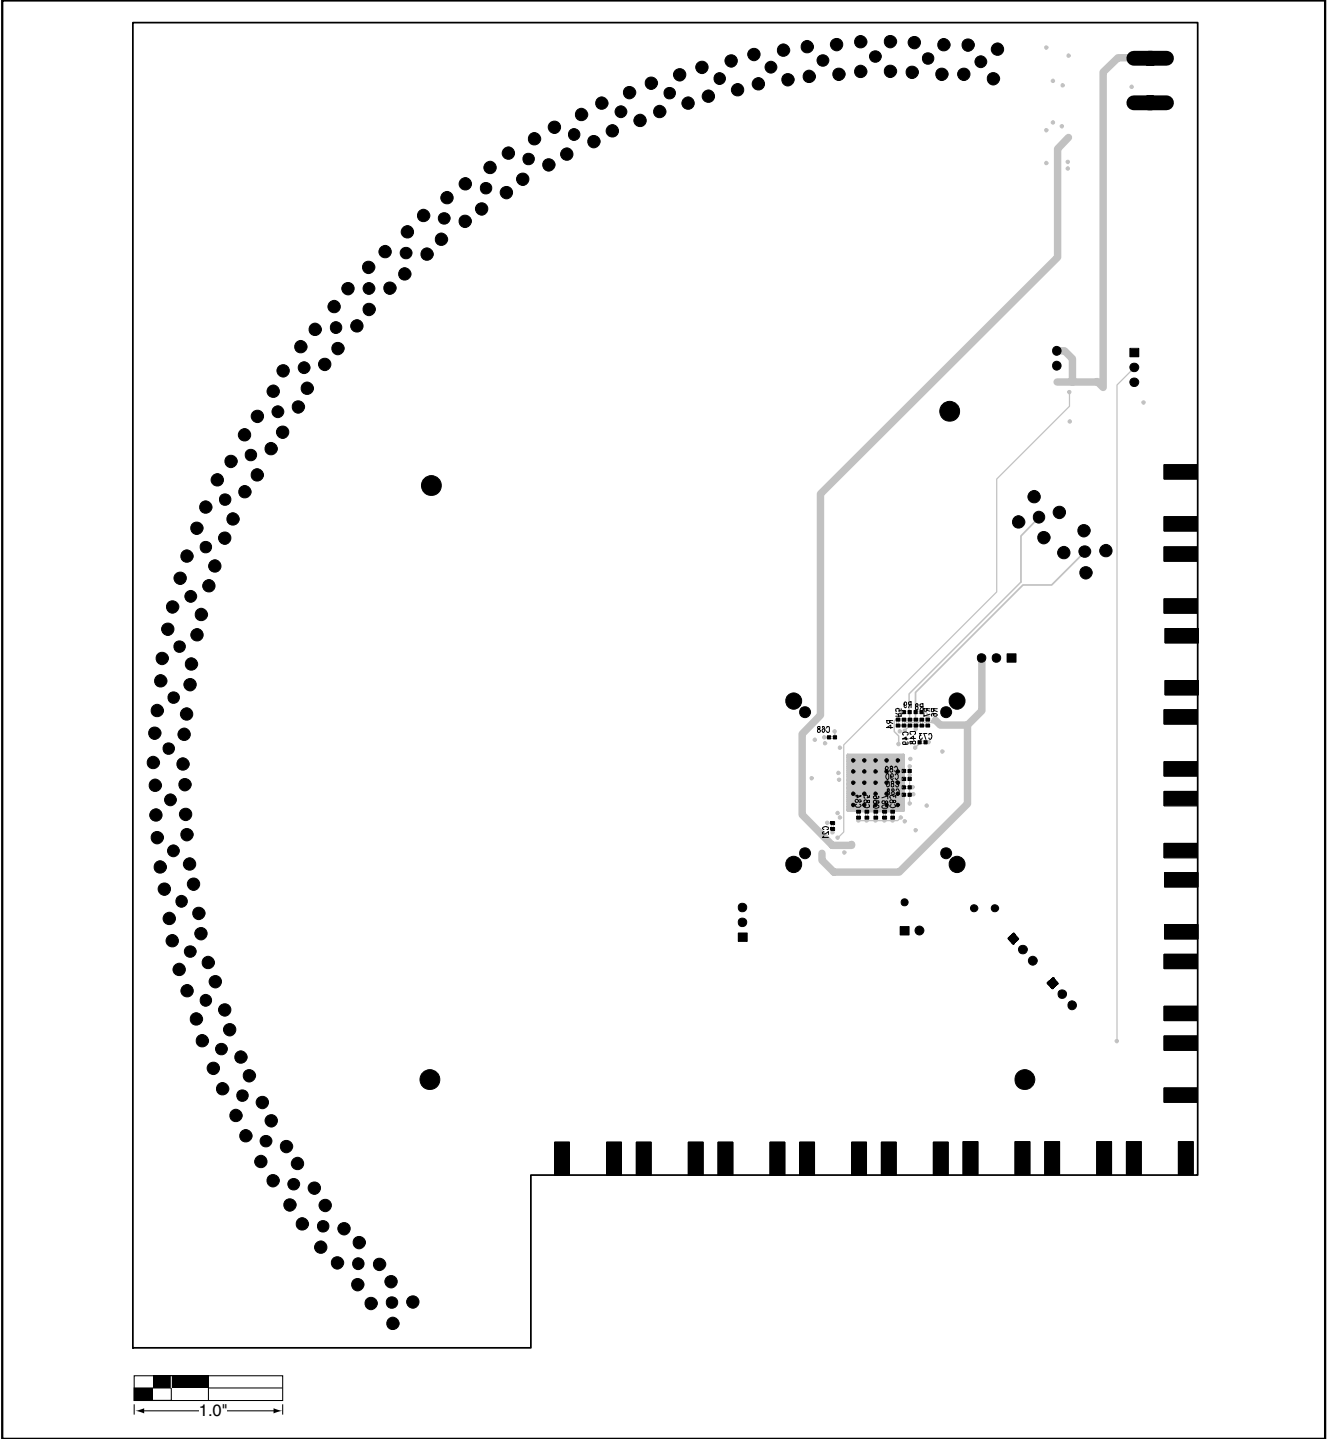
MAX3780 EV Kit Component Placement Guide—Solder Side
